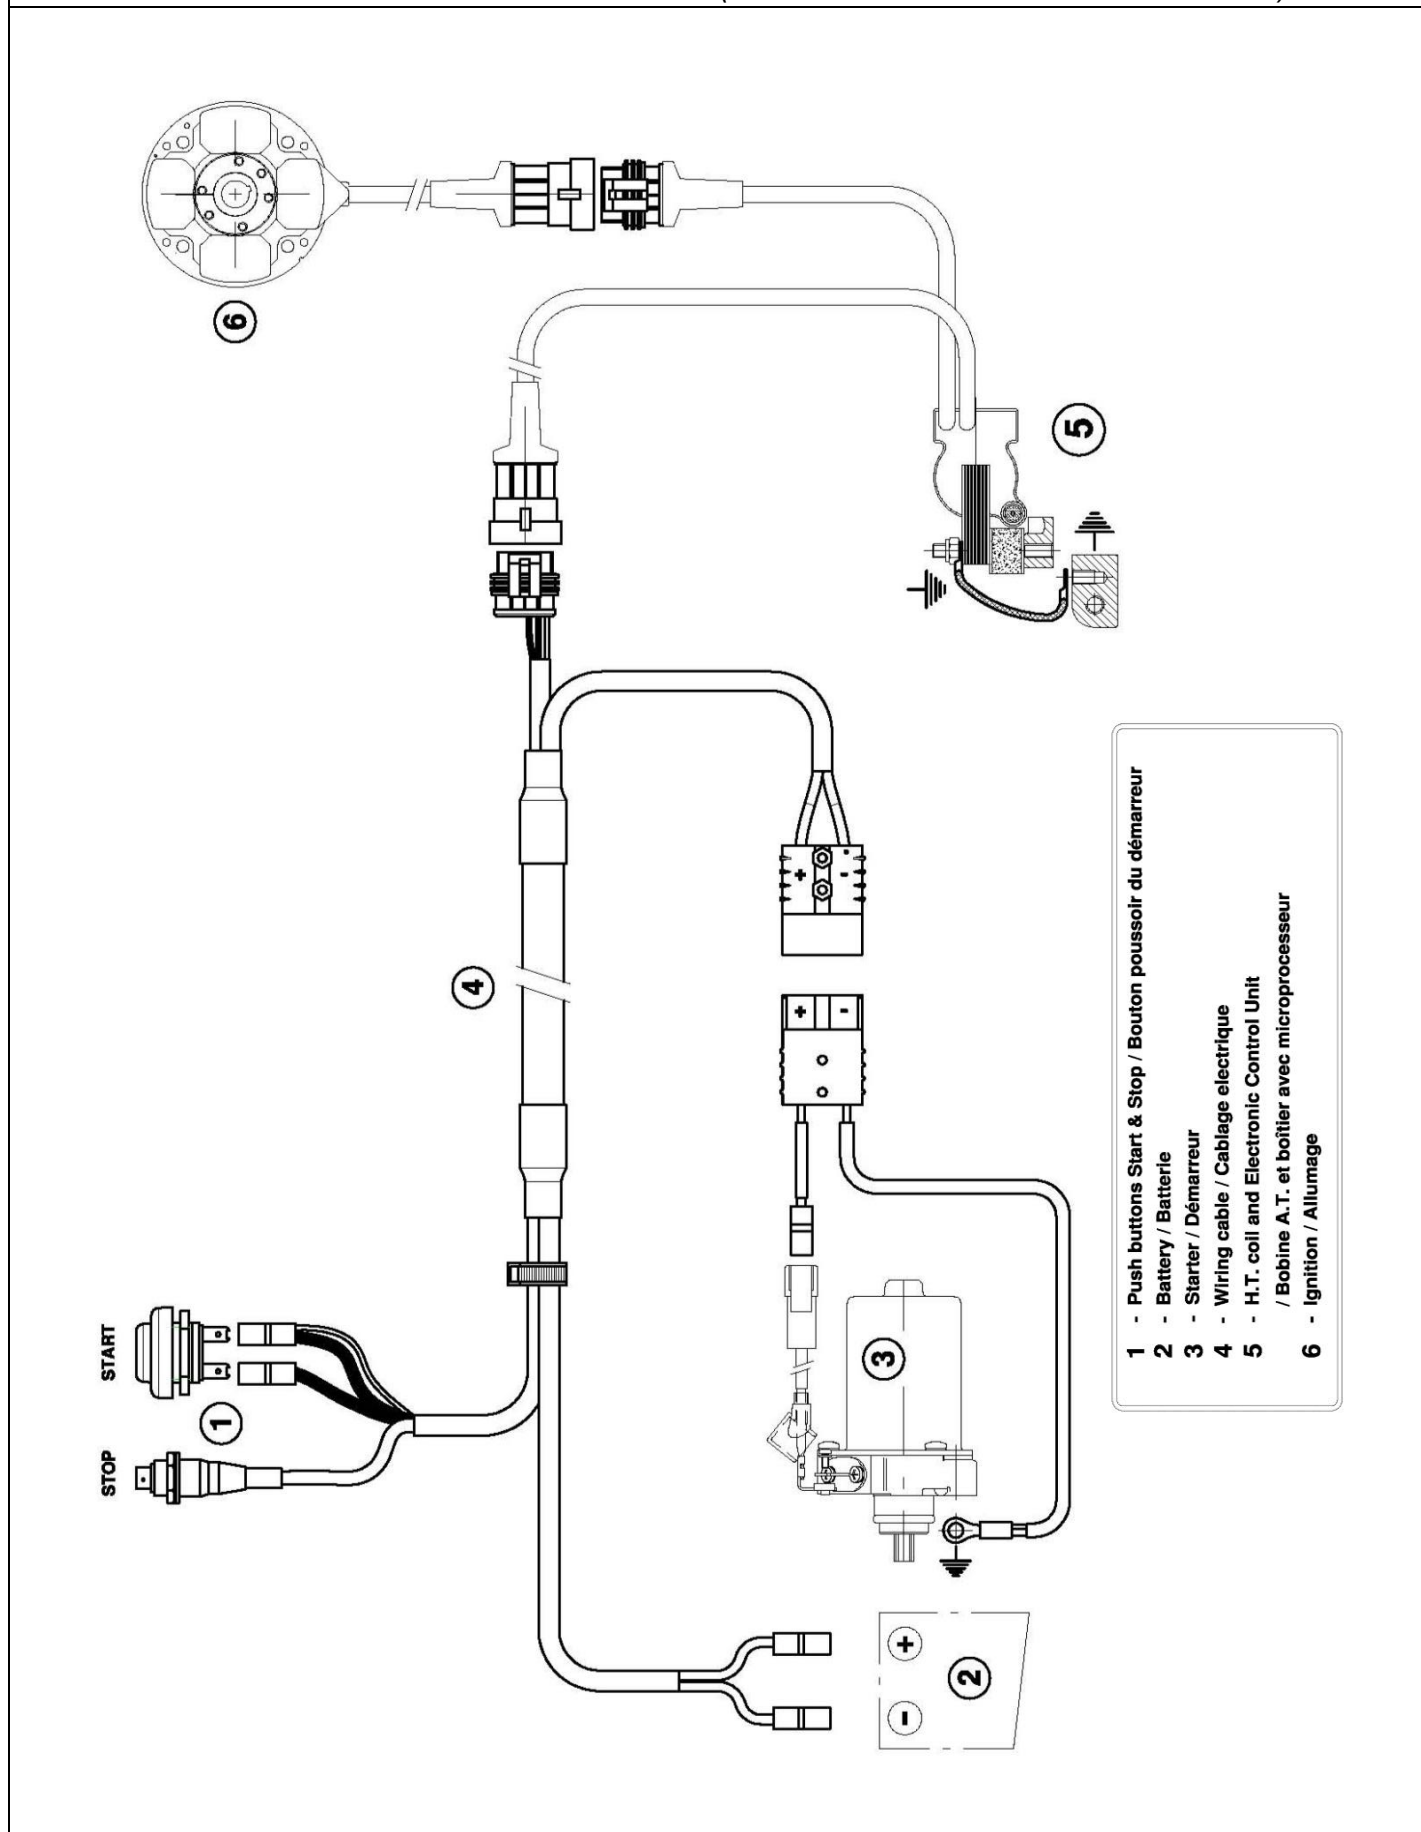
PHOTO COMPLETE ALTERNATIVE WIRING LOOM
